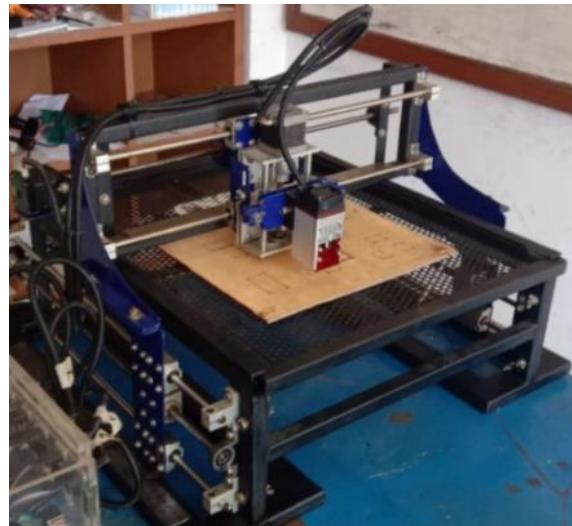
The CNC Laser Engraver Machine produced by the Research Team of Lab. LKM-ITP
